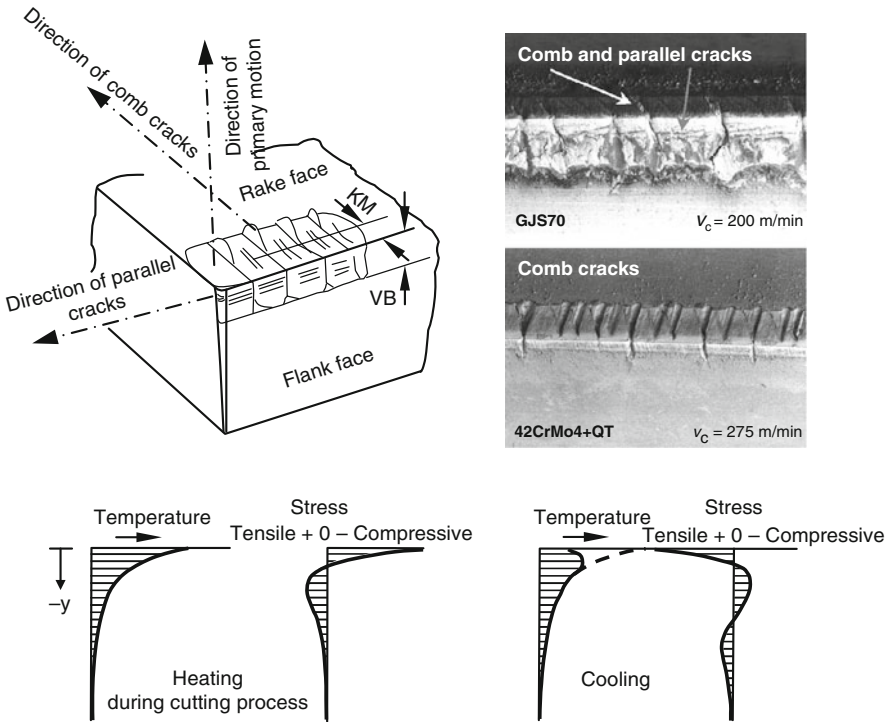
Comb and parallel crack formation in milling, acc. to VIEREGGE [Vier59]
